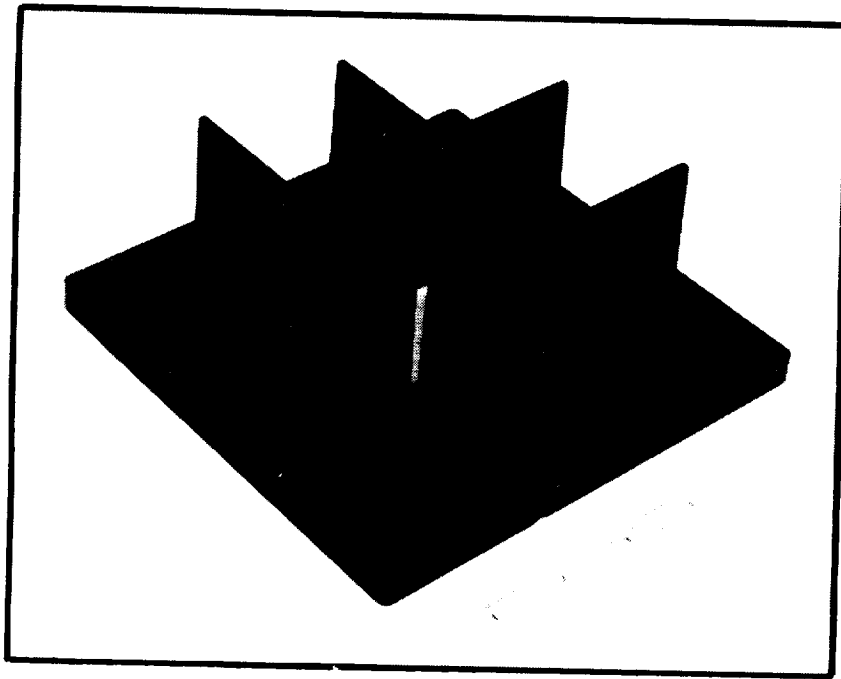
The Compression-Molded Graphite Fiber-Reinforced Corner Fitting Joins the Box-Truss Structural Members.
